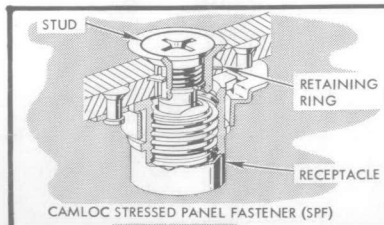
Access Door Fasteners (Sheet 1)
